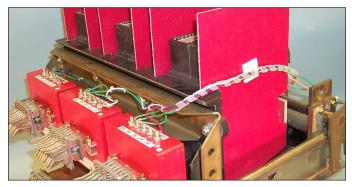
Sensor Harness Connected to the Sensors and Secured to the Left Phase Insulation Barrier and Breaker Crossbar.
